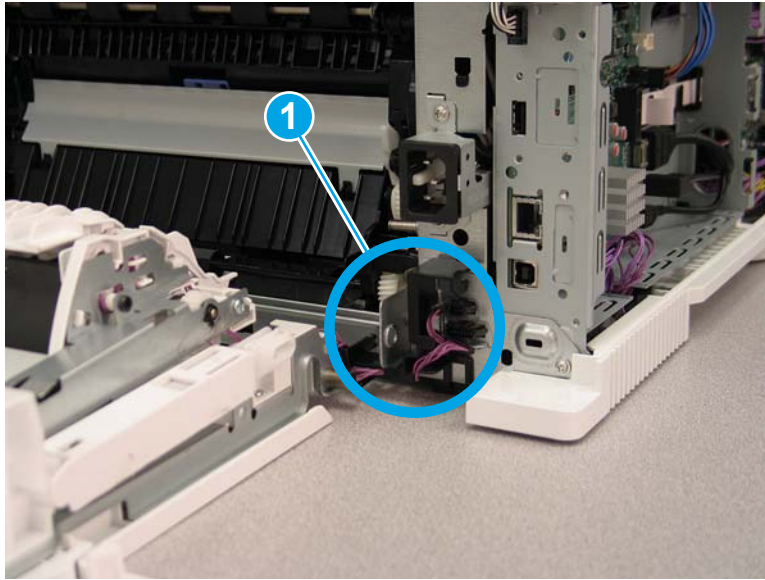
Slide the rear door assembly and release the hinge pins
